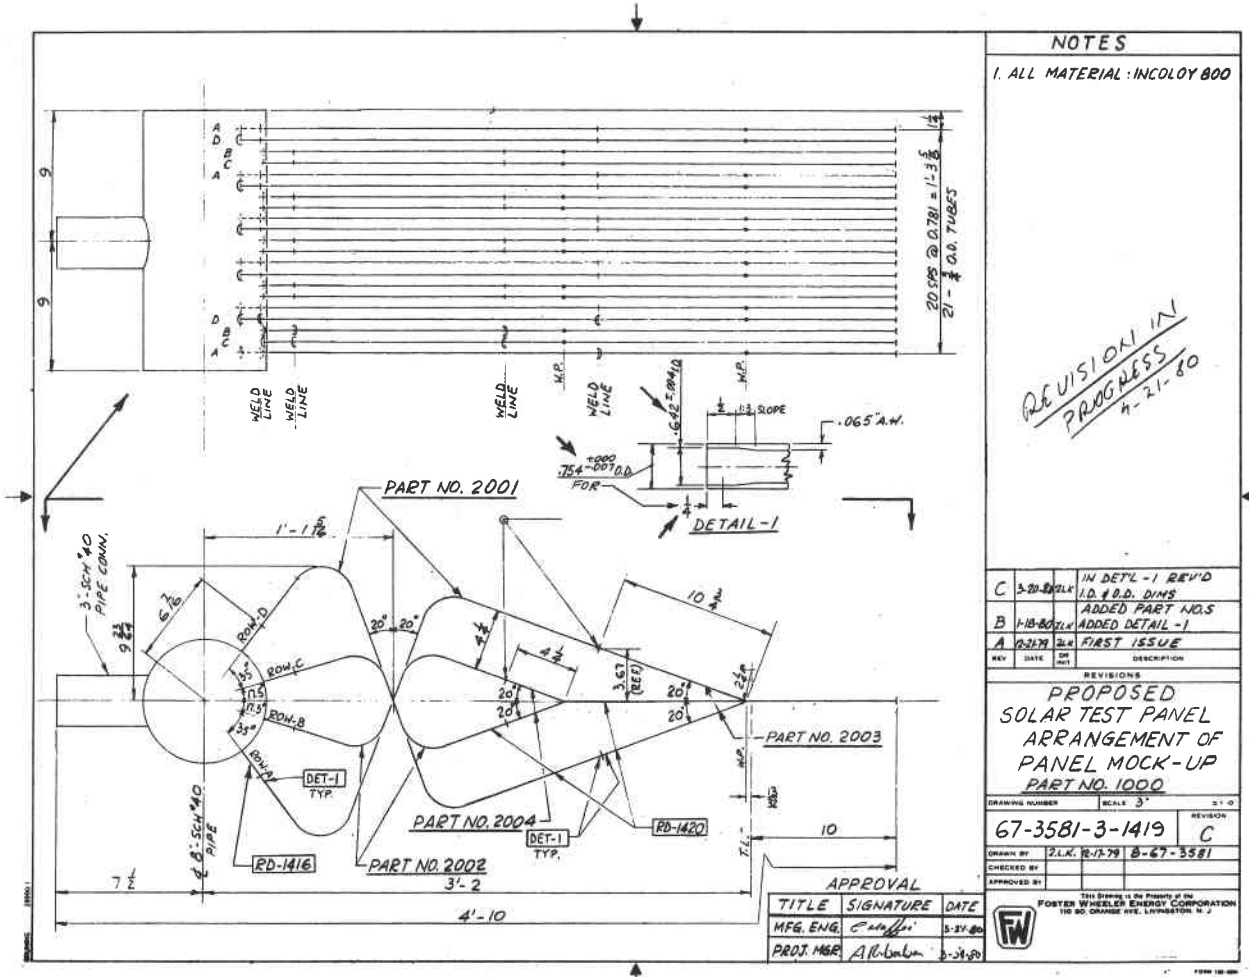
Test Panel Weld Mockup Assembly
